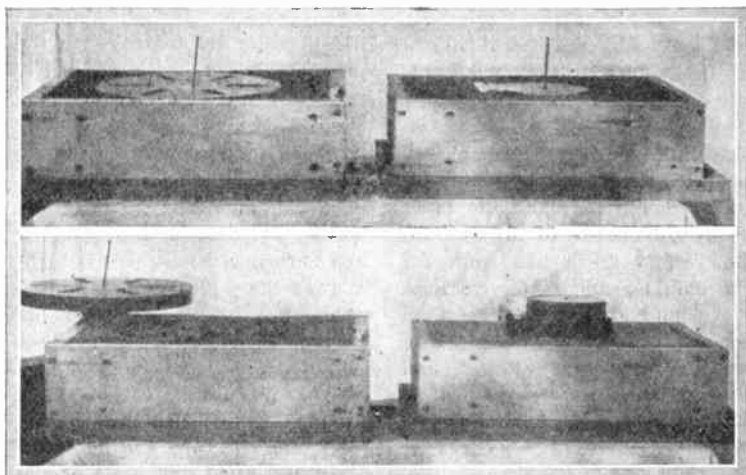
(above). Pattern exposed and piece moulded in place. Fig. 4. (below) Pattern withdrawn and two-piece pattern held together by dowel pins
